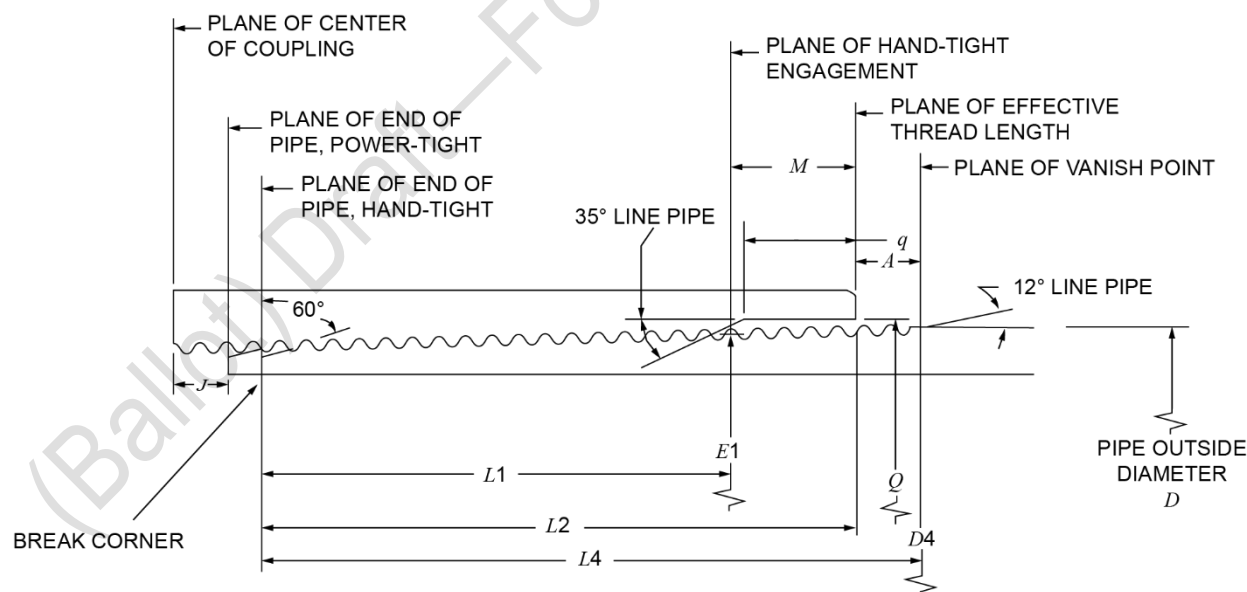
Basic Dimensions of Line Pipe Hand-tight Make-up
